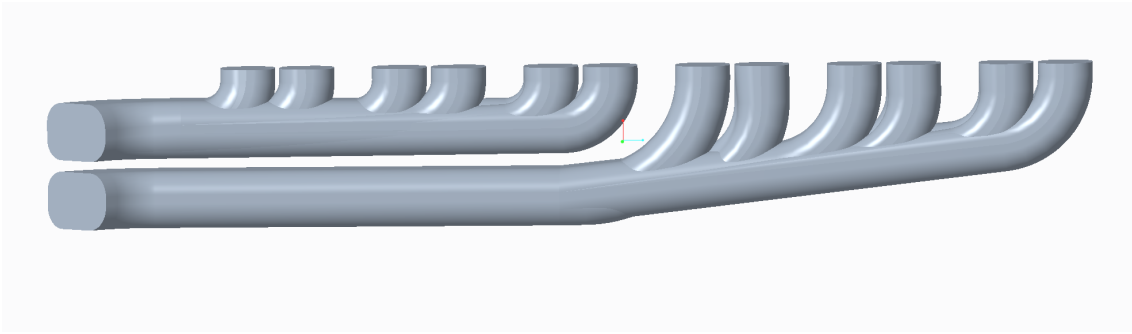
CAD of Dual Pipe Exhaust Manifold
